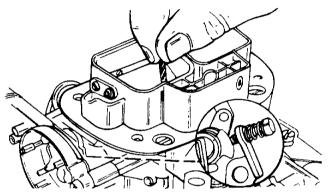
25 Checking the choke phasing. Circular inset shows the fast-idle screw against the step on the cam (Weber)
